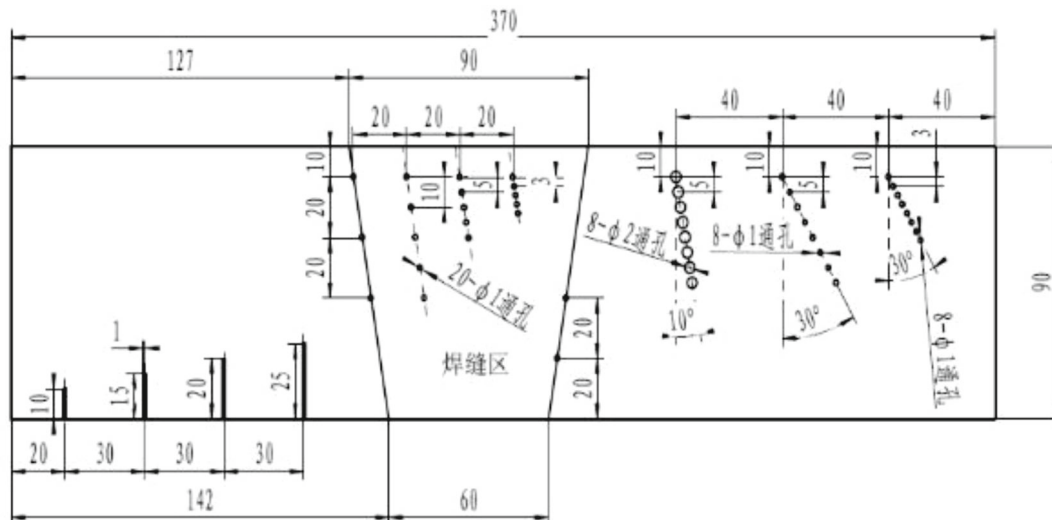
ASS specimen with butted weld (side drilled holes).
